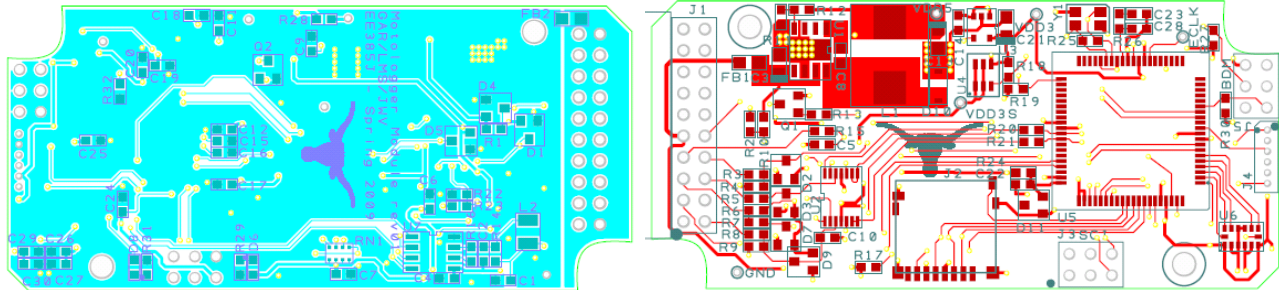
Bottom and top PCB layout for a 9S12 system.
